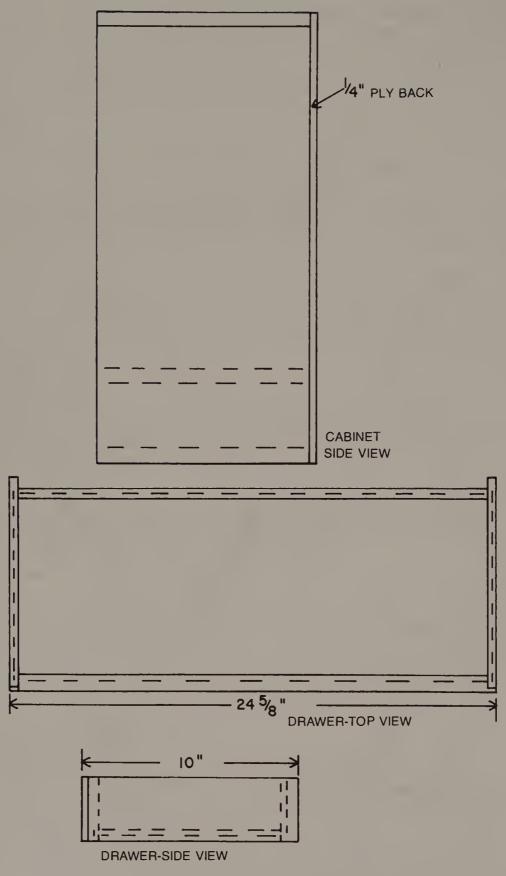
A tool cabinet will keep your tools orderly. (Continued from page 115.)
